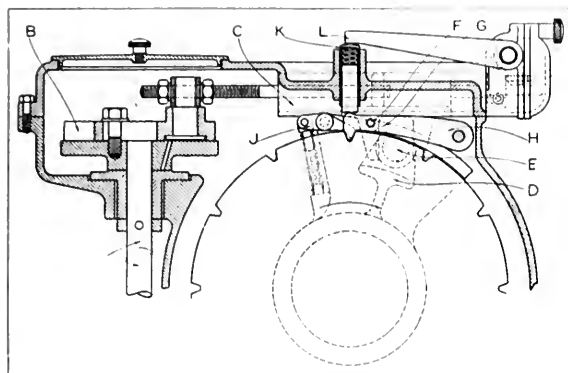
INDEXING MECHANISM FOR TRIMMING GRINDING WHEELS OF GEAR GRINDING MACHINE
